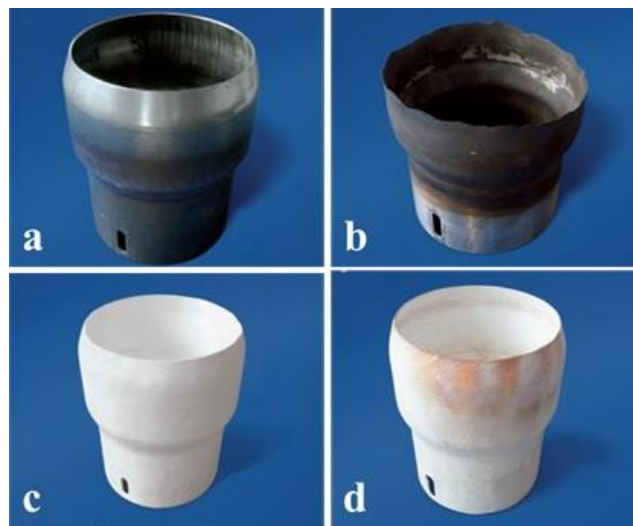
Metallic and ox/ox CMC flame tubes a) MFT before putting in operation b) MFT after 1000 h of operation c) Ox/ox CMC tube before putting in operation d) Ox/ox flame tube after > 20000 h in operation [24].
